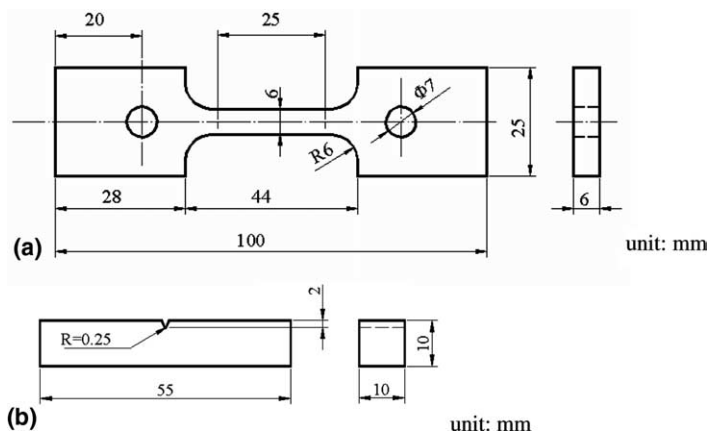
Dimensions of the specimens for, (a) tensile testing; (b) impact testing.
